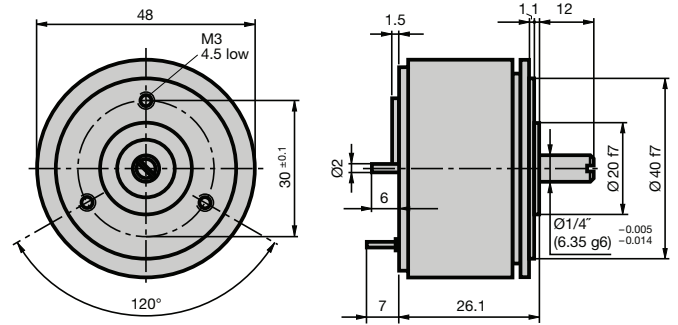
KINAX 2W2 with special drive shaft at front and rear.
